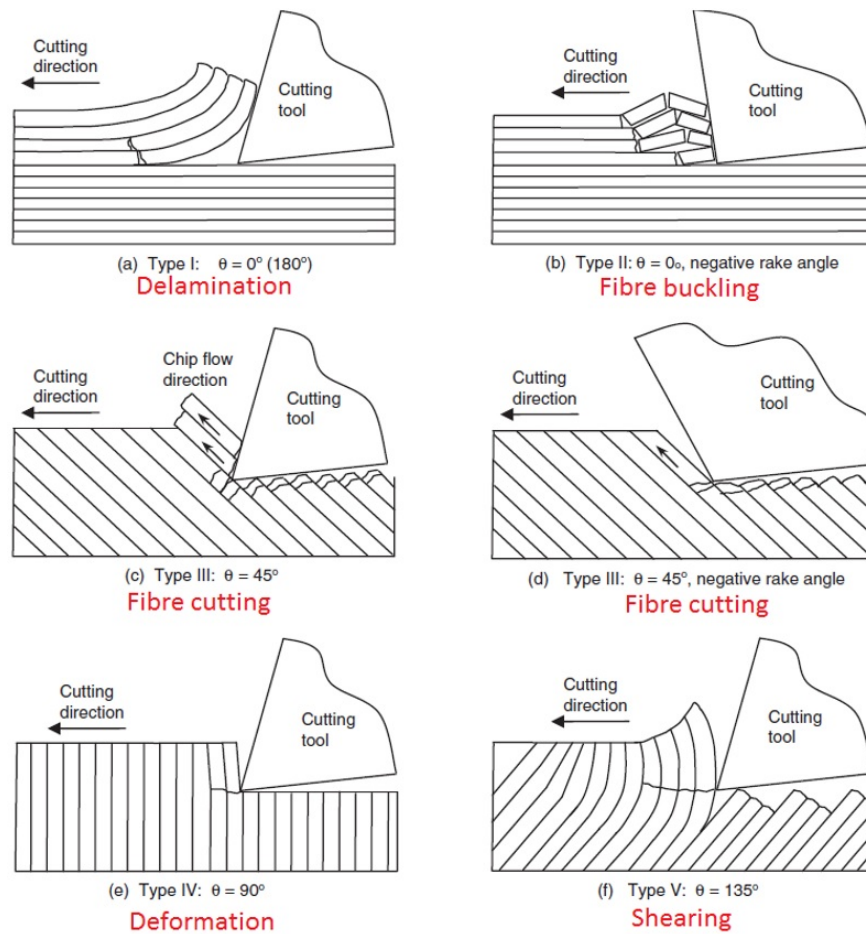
Chip formation modes when machining composites using a sharp cutting edge [29, 42]
